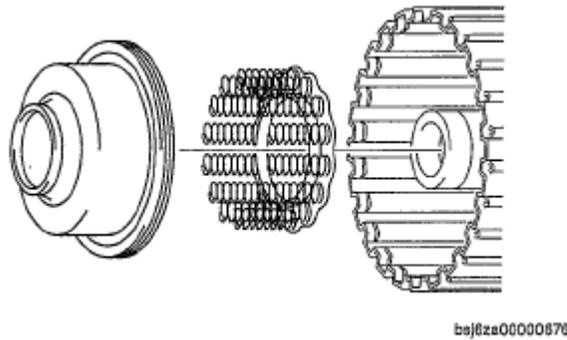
Identifying C1 Clutch Seal Plate And Piston Return Spring
